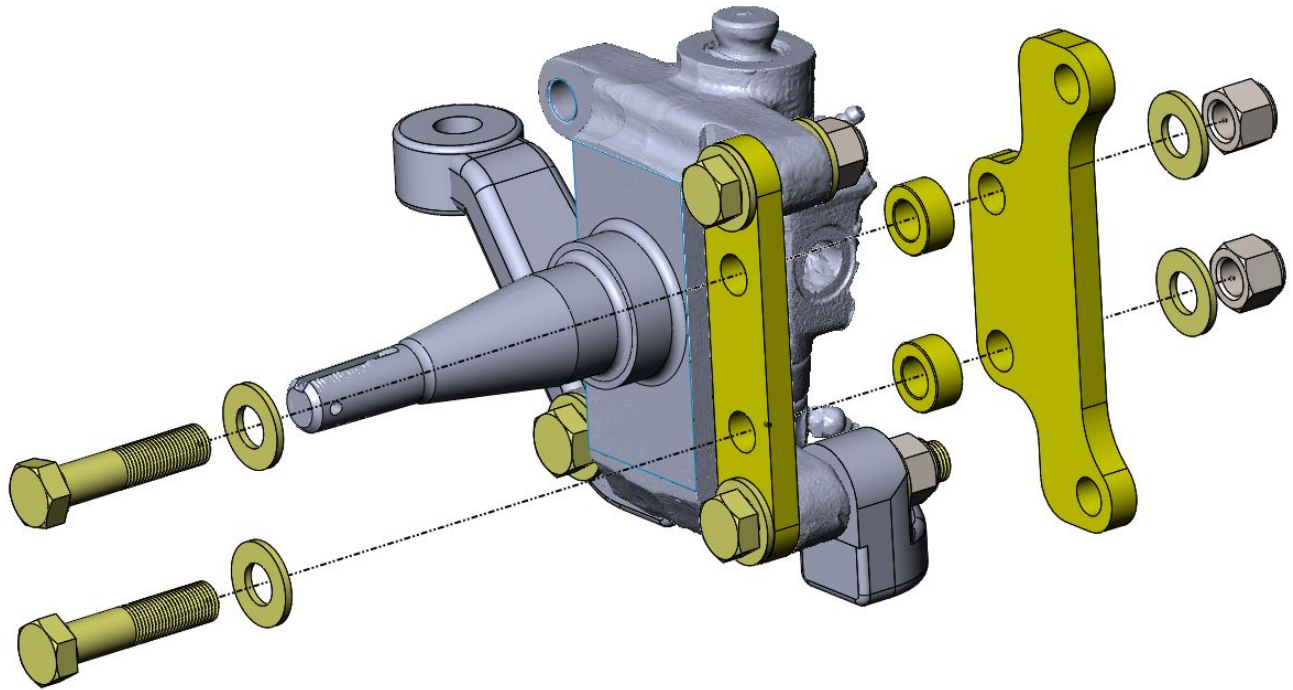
Intermediate Caliper Mounting Bracket Installation (Passenger Side Shown)
